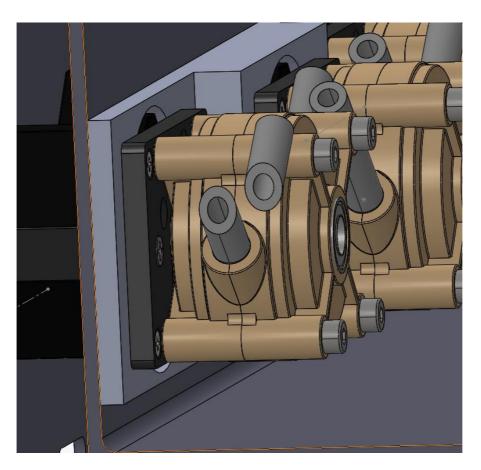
The pump with the holder along with the stepping for easier pipe connectivity.
